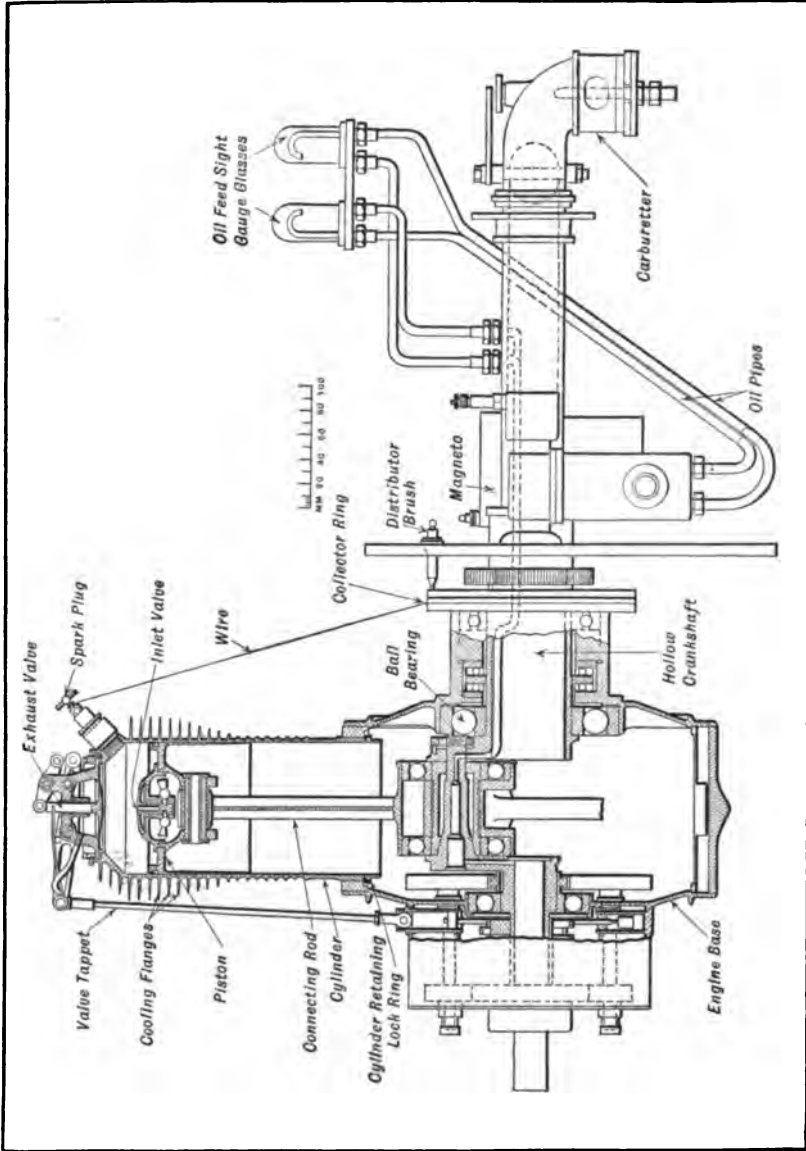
Sectional view showing arrangement of internal parts of the Gnome rotating cylinder motor.
